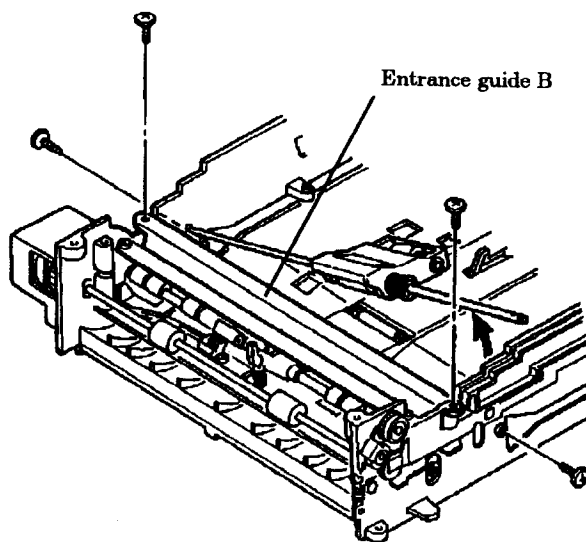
REMOVING THE PICKUP ROLLER ASSEMBLY
